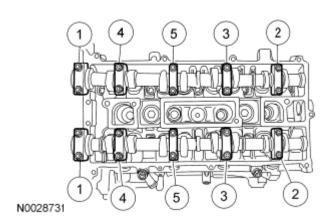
Identifying Camshaft Bearing Bolts Tighten Sequence Courtesy of FORD MOTOR CO.
